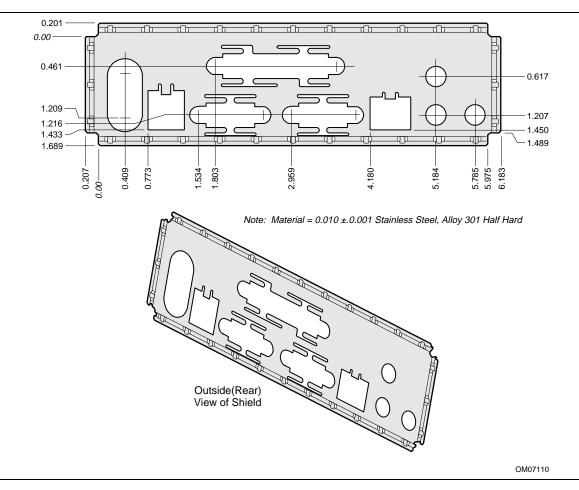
Back Panel I/O Shield Dimensions (ATX Chassis-Independent)
